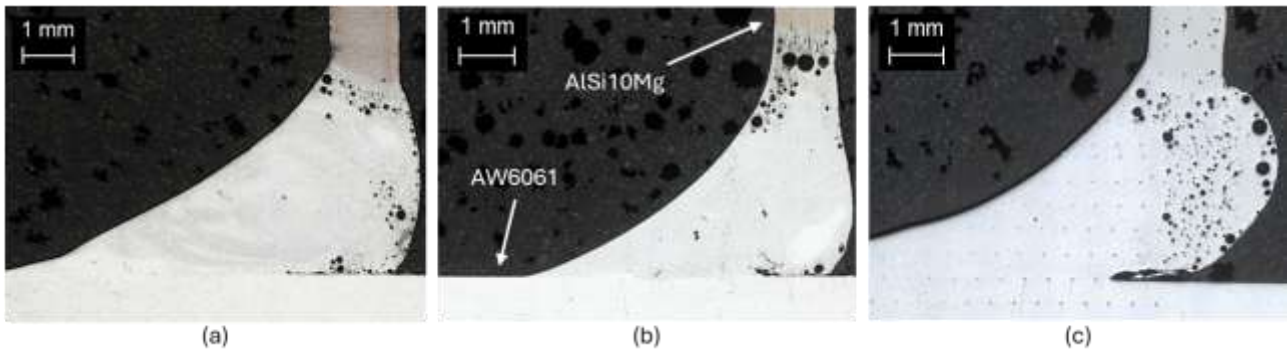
Cross-sections of specimens welded with (a) continuous GTAW, (b) pulsed GTAW at 80 Hz and (c) 100 Hz.
